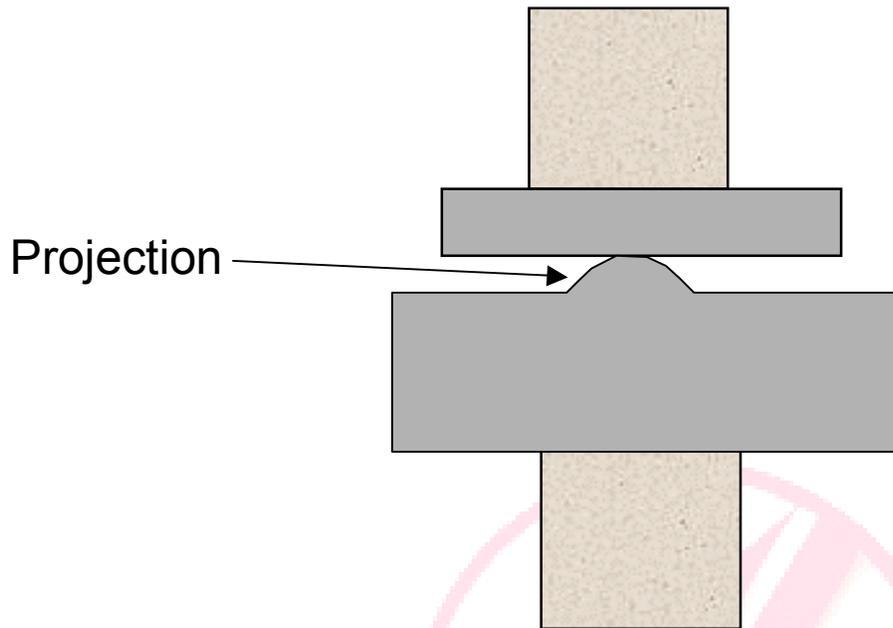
Schematic shows a weld stack with a projection in the bigger component to improve heat balance. If parts are of similar size, projection should be made in the more conductive component.
